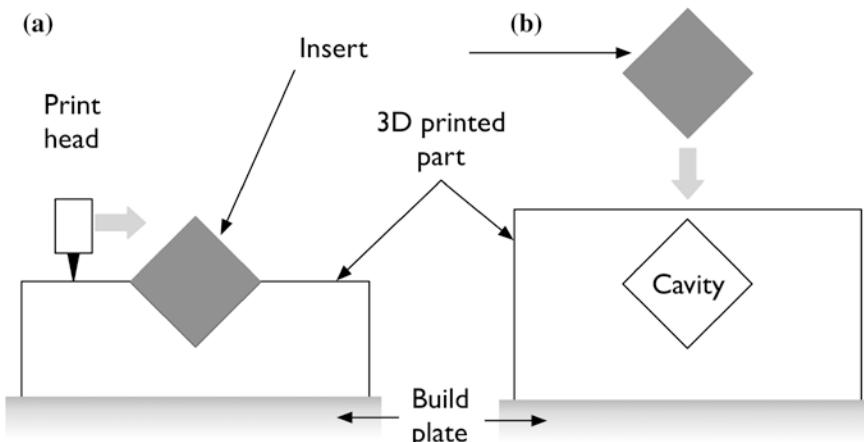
Use of inserts in 3D printing, a print head collides with protruding insert b Insert cannot be embedded until the build is as tall as the insert, but by that point the cavity could be enclosed
